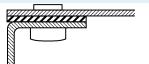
Insert Pressed-In and Flared Makes EMI Tight Joint (Alternate: Weld or Cement with Conductive Epoxy)
